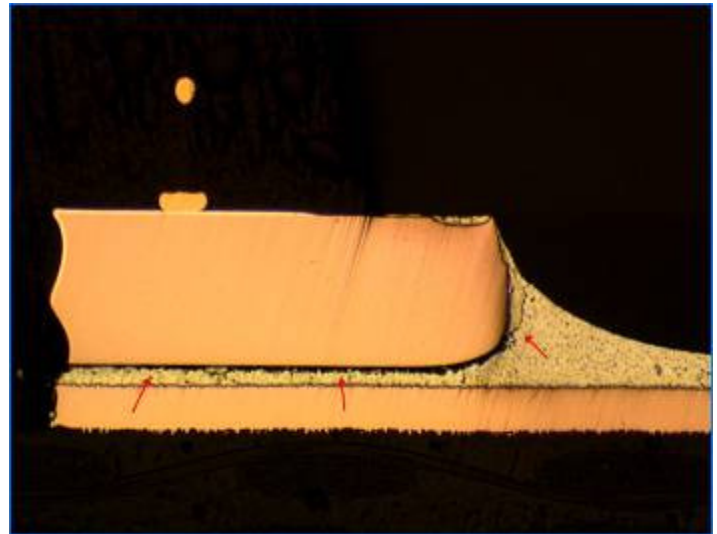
cross section, SN68, U28, right lead solder crack, 100x
